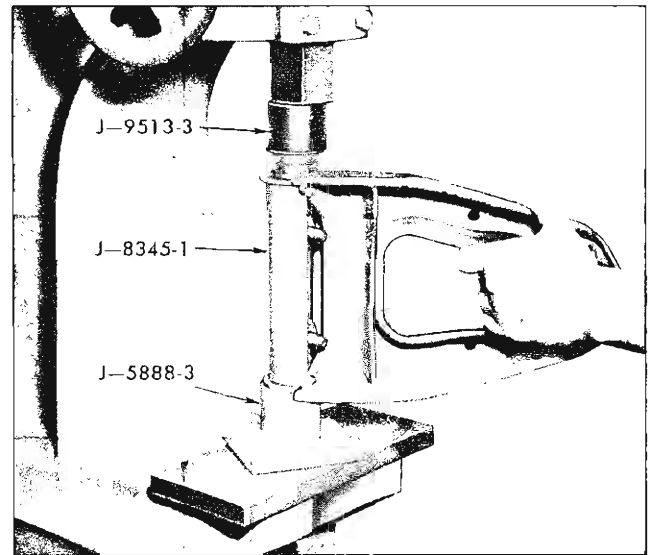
Installing Remaining Pivot Shaft Bushing—Chevy II
